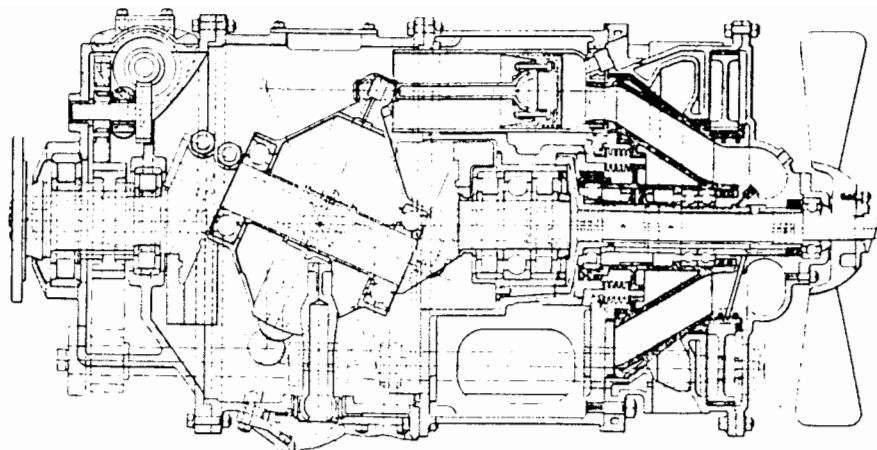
A nine-cylinder axial engine developed by Bristol Tramways and Carriage Co., Ltd.
